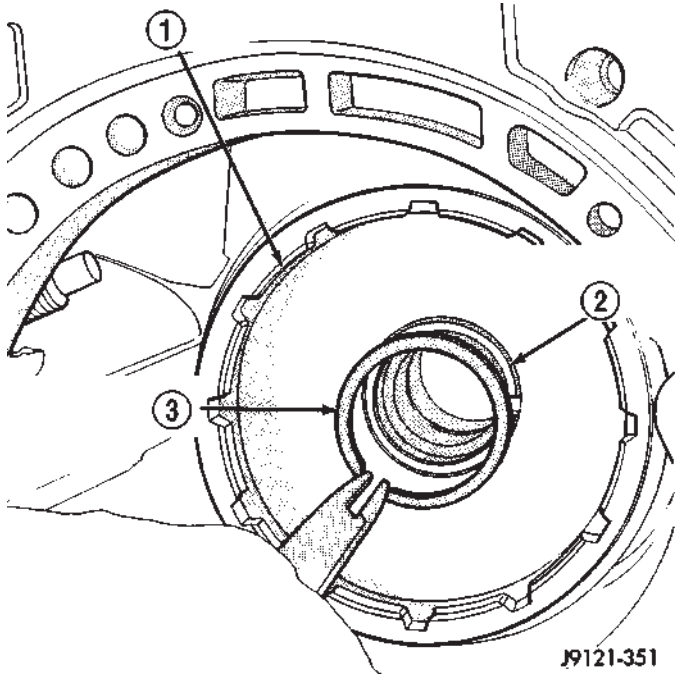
Installing Low-Reverse Drum Retaining Snap-Ring
